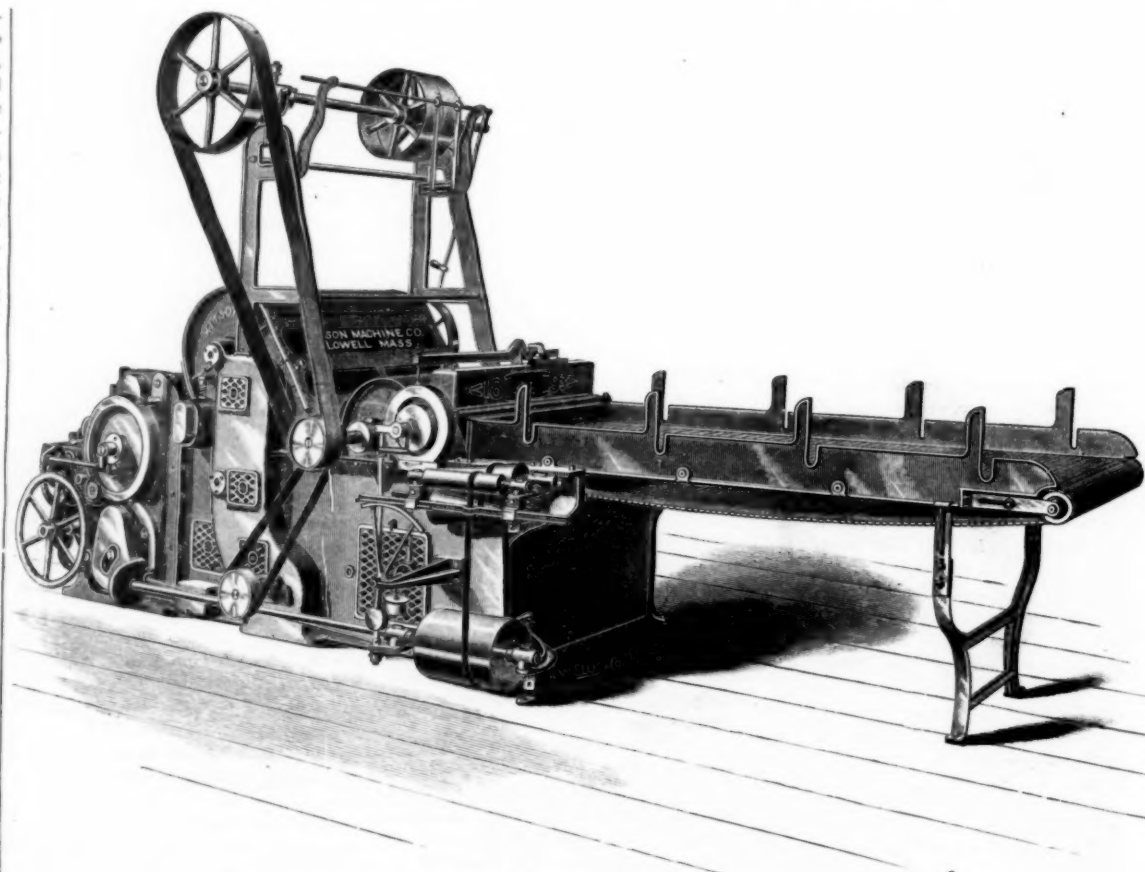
SINGLE SECTION FINISHER LAPPER.
